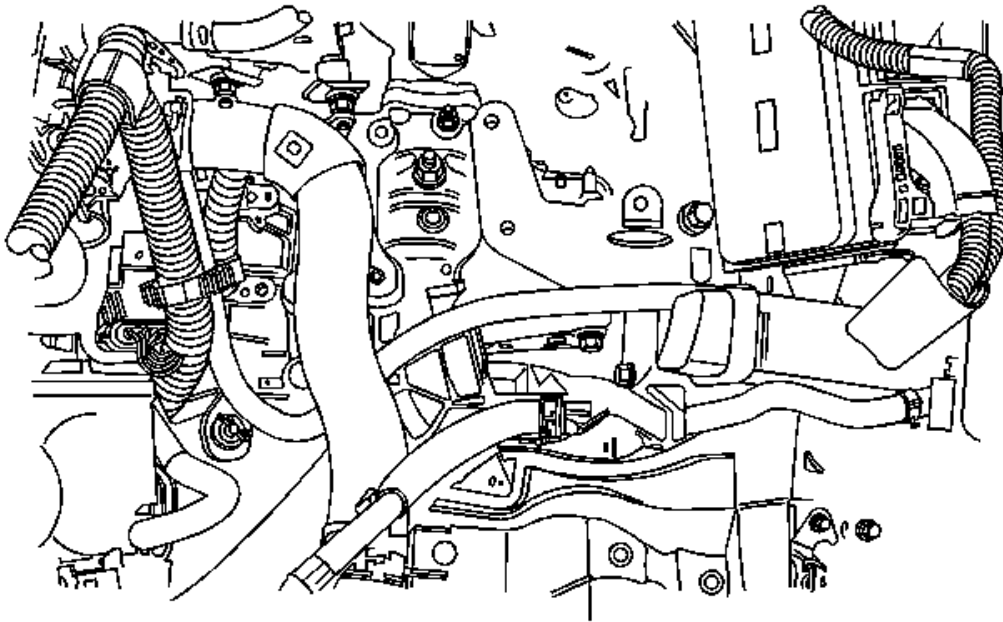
View Of Engine Block Heater Harness Plug Bundle
